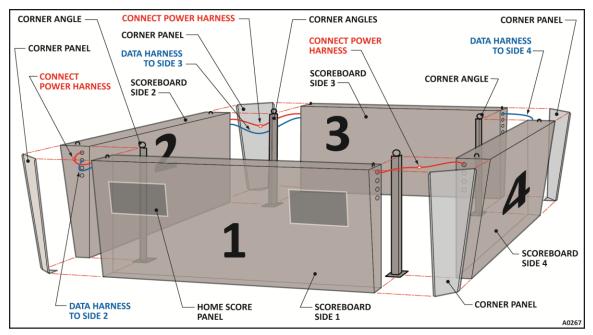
ASSEMBLY OF FOUR-SIDED SCOREBOARD
